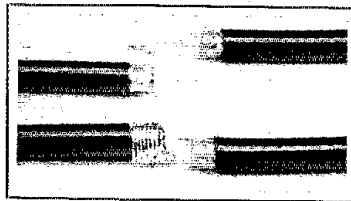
Prepared ends of the coaxial cable and the method of soldering them together.
